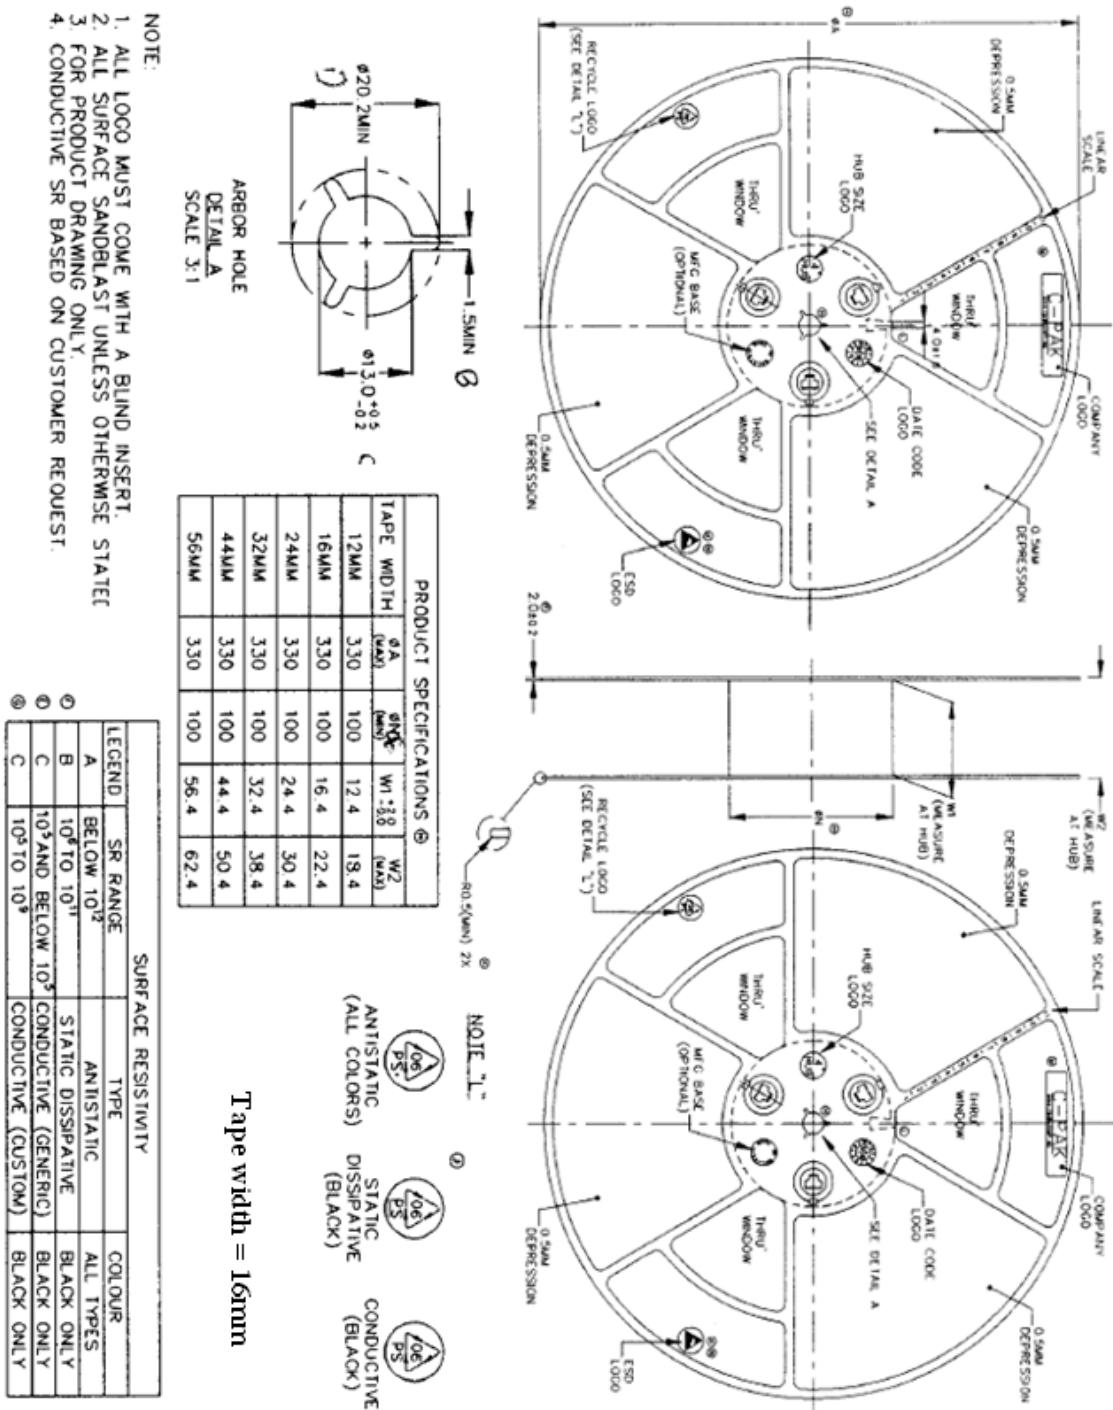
VNC2 – LQFP-32, LQFP-48, LQFP-64, QFN-32, QFN-48 and QFN-64 , FT311D-LQFP Reel Dimensions
